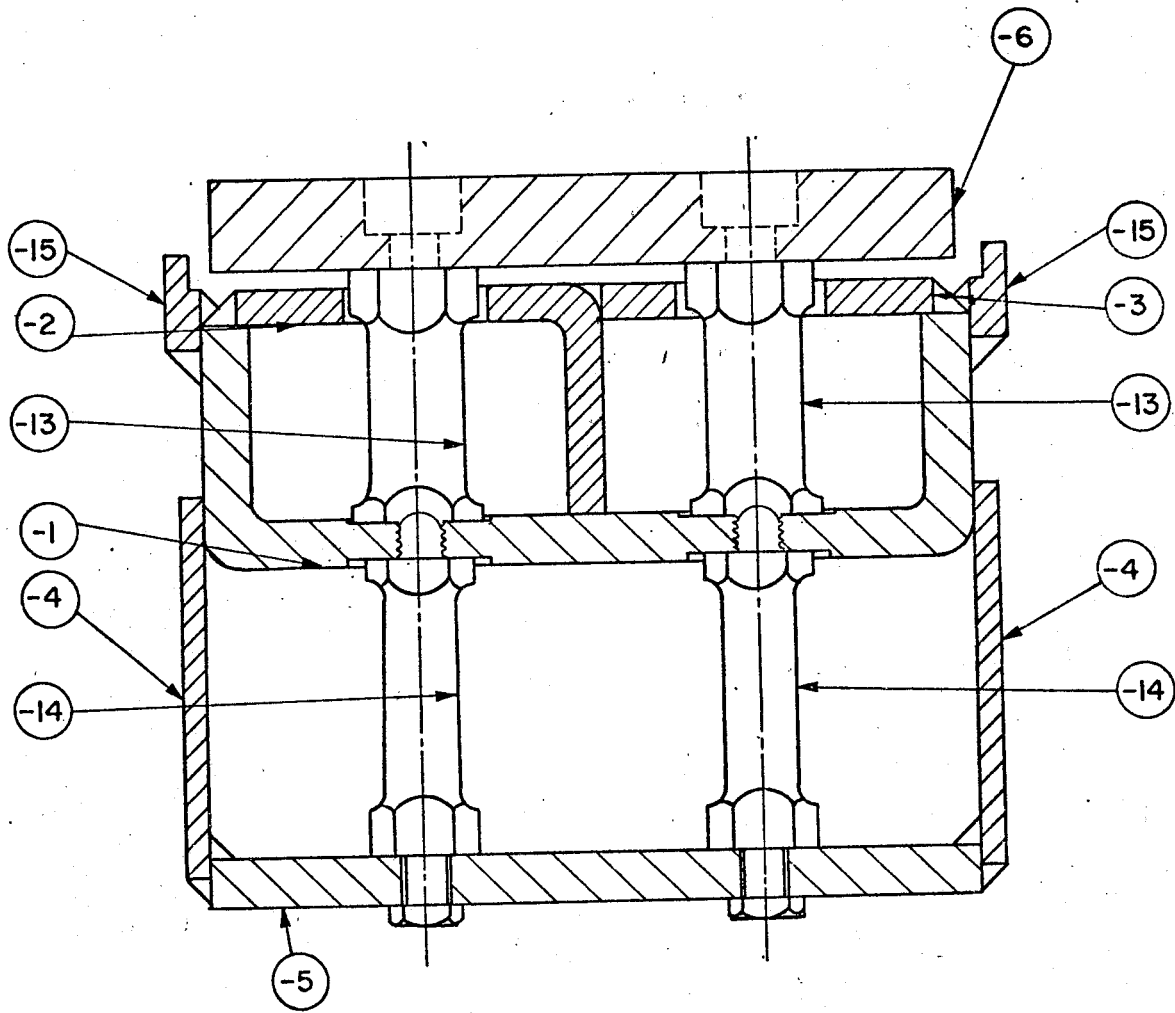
WOOD TIE ASSEMBLY - CROSS SECTION
